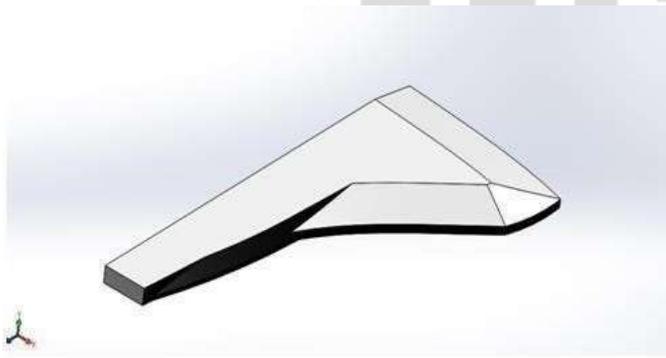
CAD model of a Space Shuttle Wing
